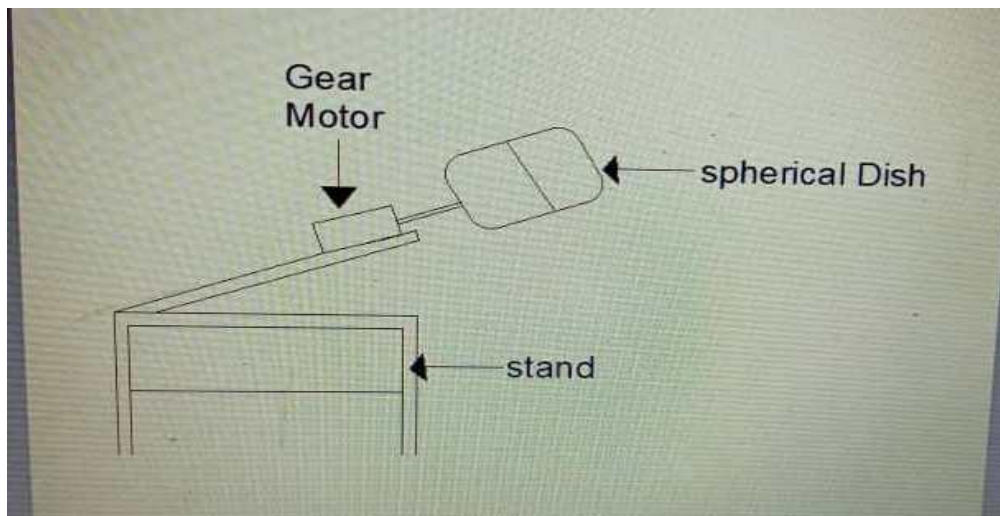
Auxiliary pictorial view of peanut mixing machine
